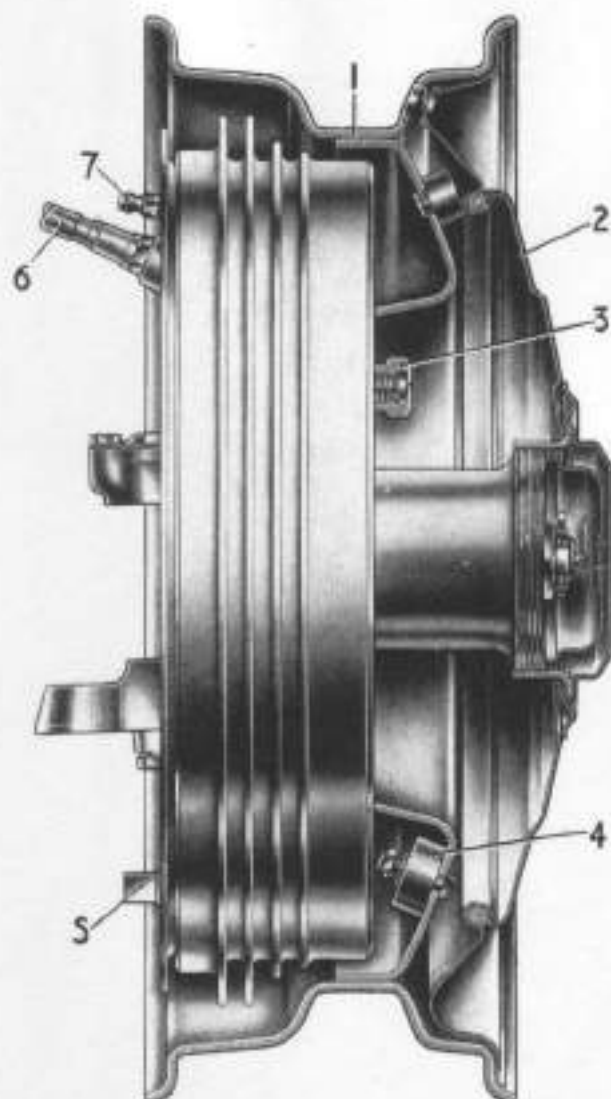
SECTION OF FRONT HUB AND WHEEL.
